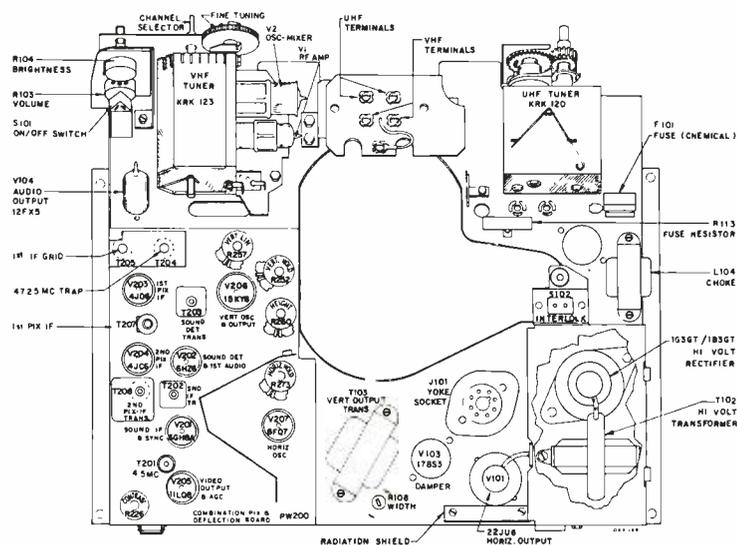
Rear view of KCS152, 145-volt receiver layout.
